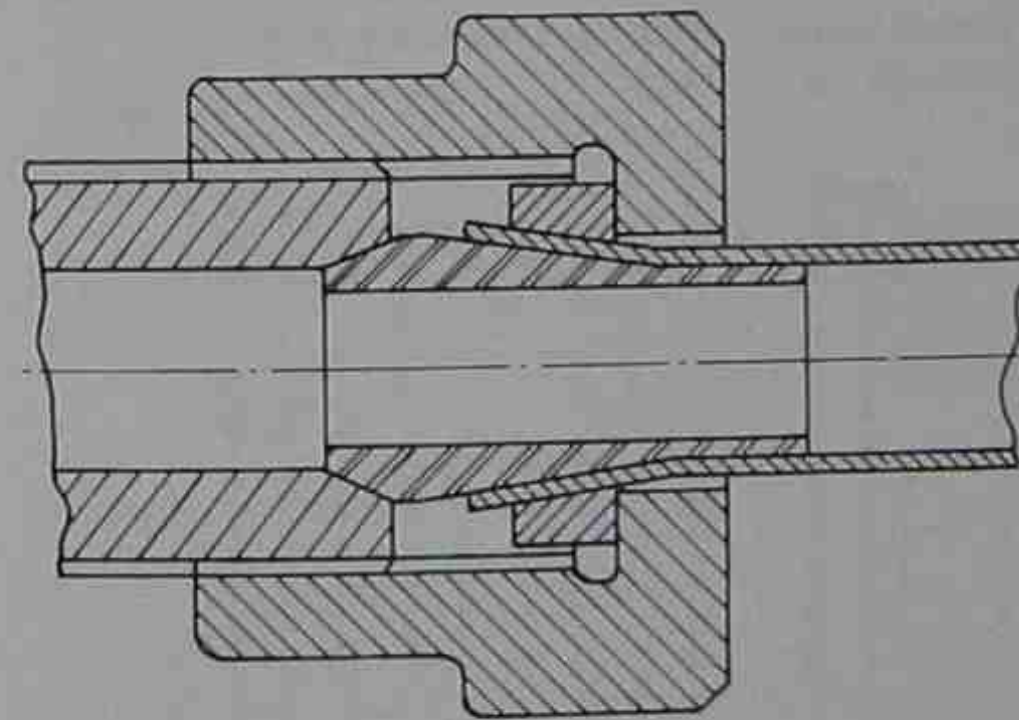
Screwed brass pipe coupling (nut-and-sleeve)
